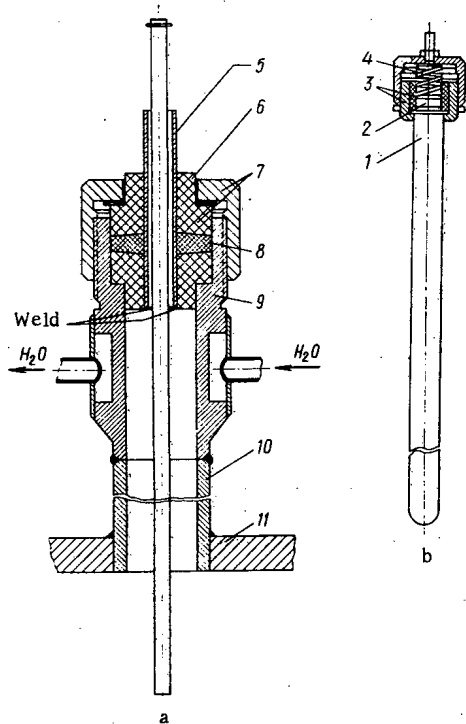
Mounting unit for the waveguide of sound receiver (a) and design of sound receiver (b). 1) Waveguide; 2) piezoelectric transducer; 3) insulating bushings; 4) spring; 5) centering tube; 6) nut; 7) and 8) tightening bushings and washer; 9) cooled fitting; 10) reducing pipe; 11) tank lid.
